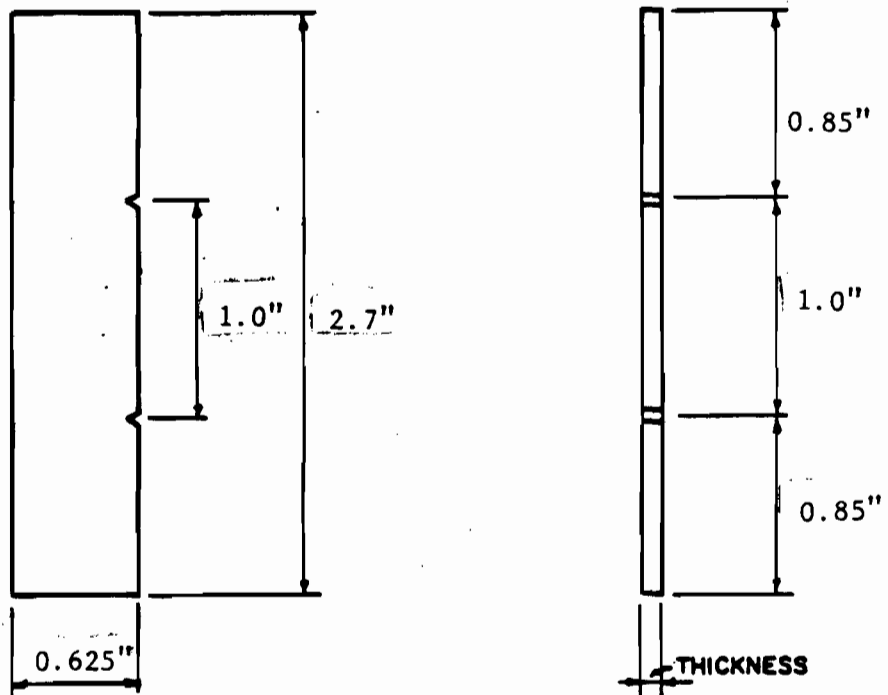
Nominal Dimensions of Compression Coupons Used for All Sheet Steels
